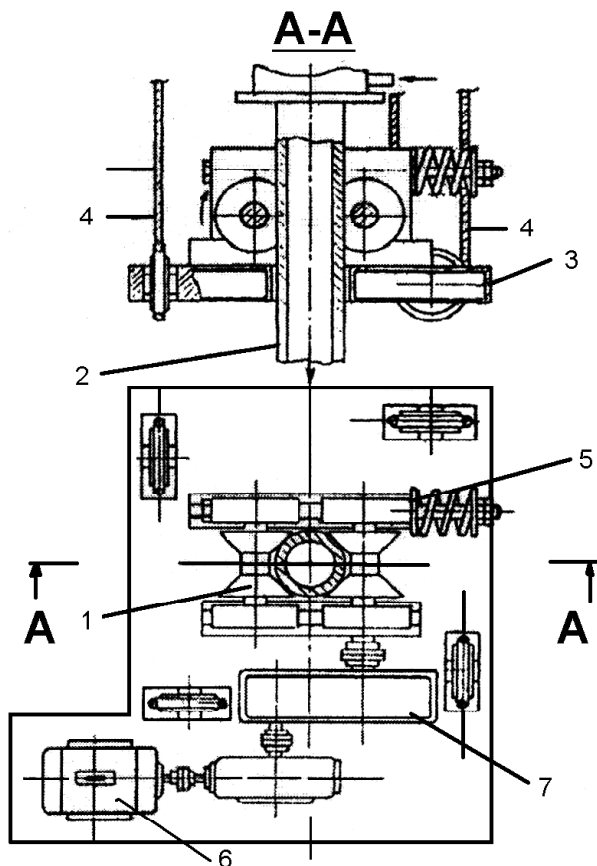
Extraction mechanism of hollow billets continuous casting machine: 1 – withdrawal rollers; 2 – hollow billet; 3 – table; 4 – ropes; 5 – device for regulation of withdrawal rollers; 6 – gear; 7 – gear box.
